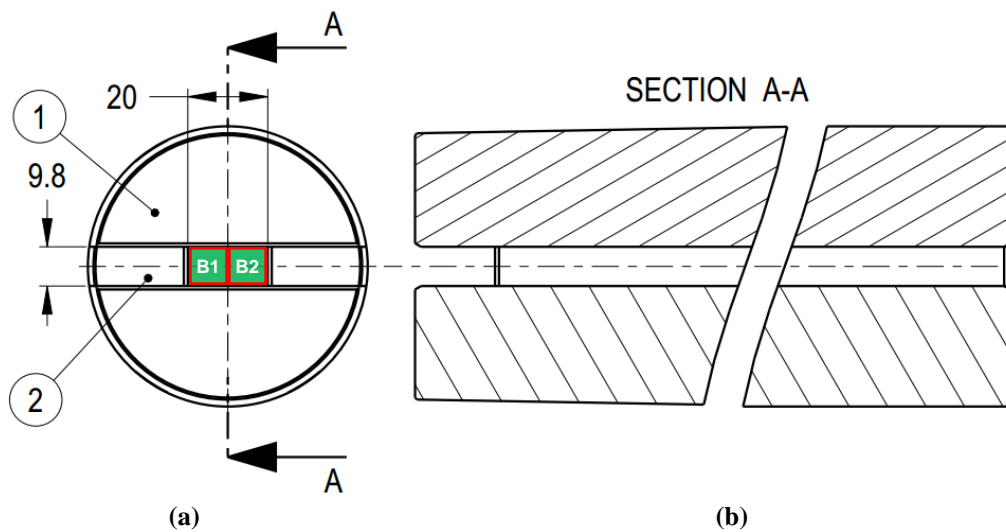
Die insert sub-assembly (a) top view showing the rectangular shaped channel with two billets (B1 and B2), the two longer die inserts (labelled 1) and two shorter die inserts (labelled 2) and (b) cross-sectional cut along A-A.
